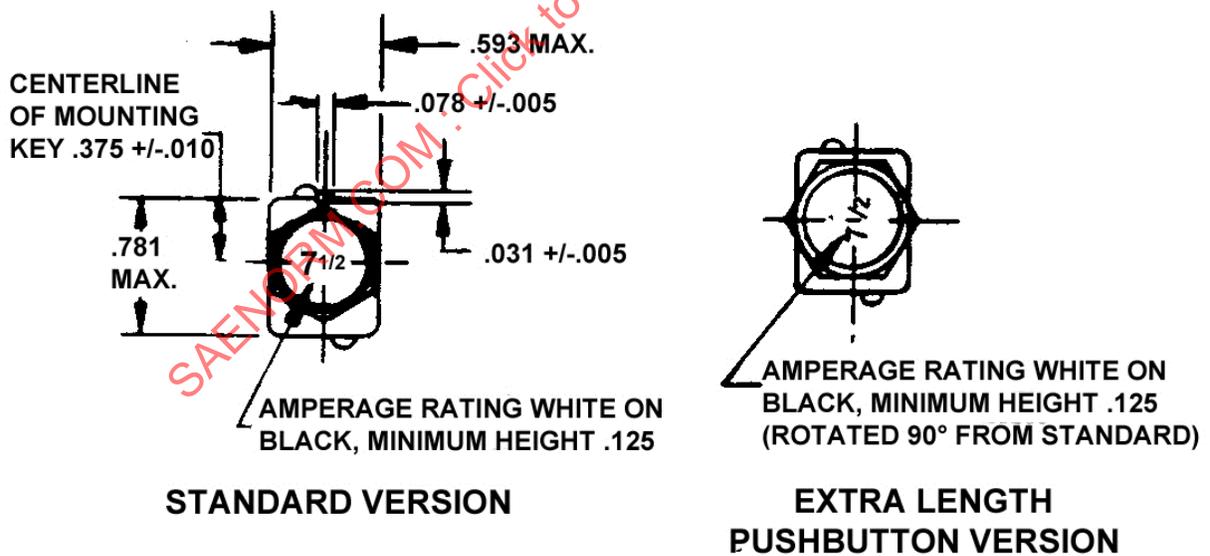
CIRCUIT BREAKER CONFIGURATIONS AND DIMENSIONS
